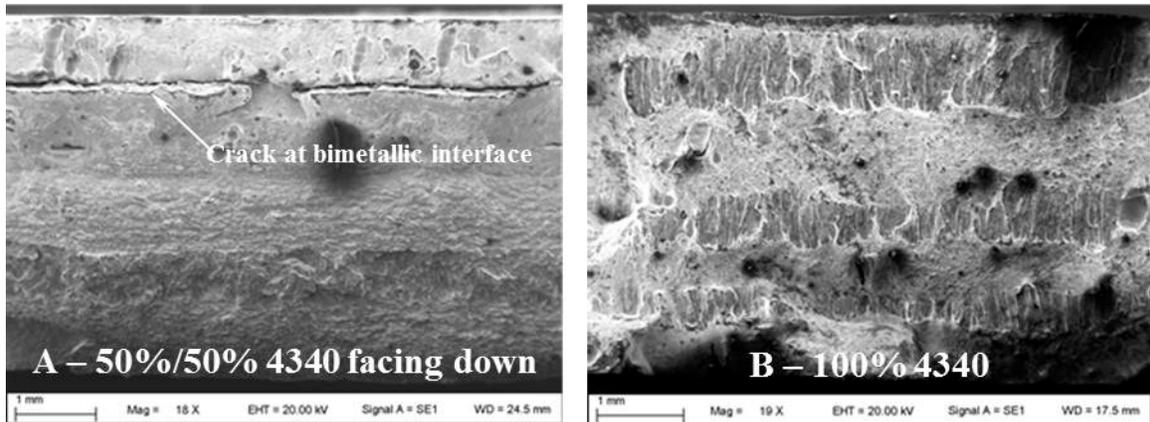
SEM view of side bend test fractures (4340 steel deposit)
